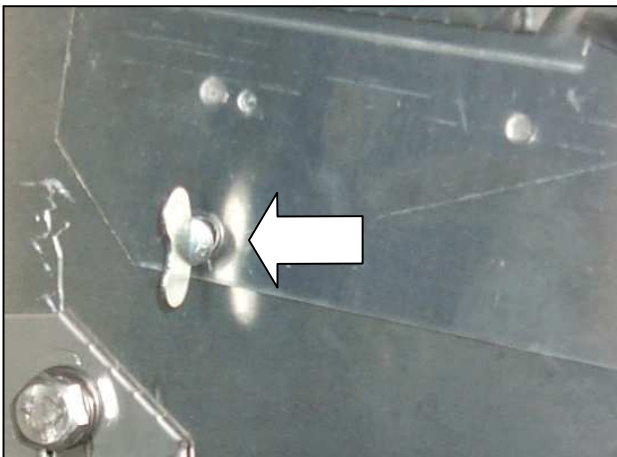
Front unit air filter assembly twist lock (left hand shown)
